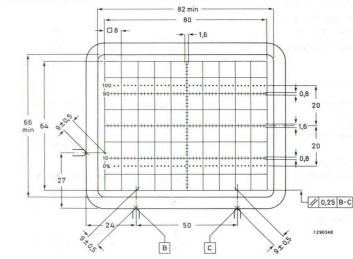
Front view of tube with internal graticule, type 119. Line thickness = 0,2 mm; dot diameter = 0,4 mm; colour: red.
